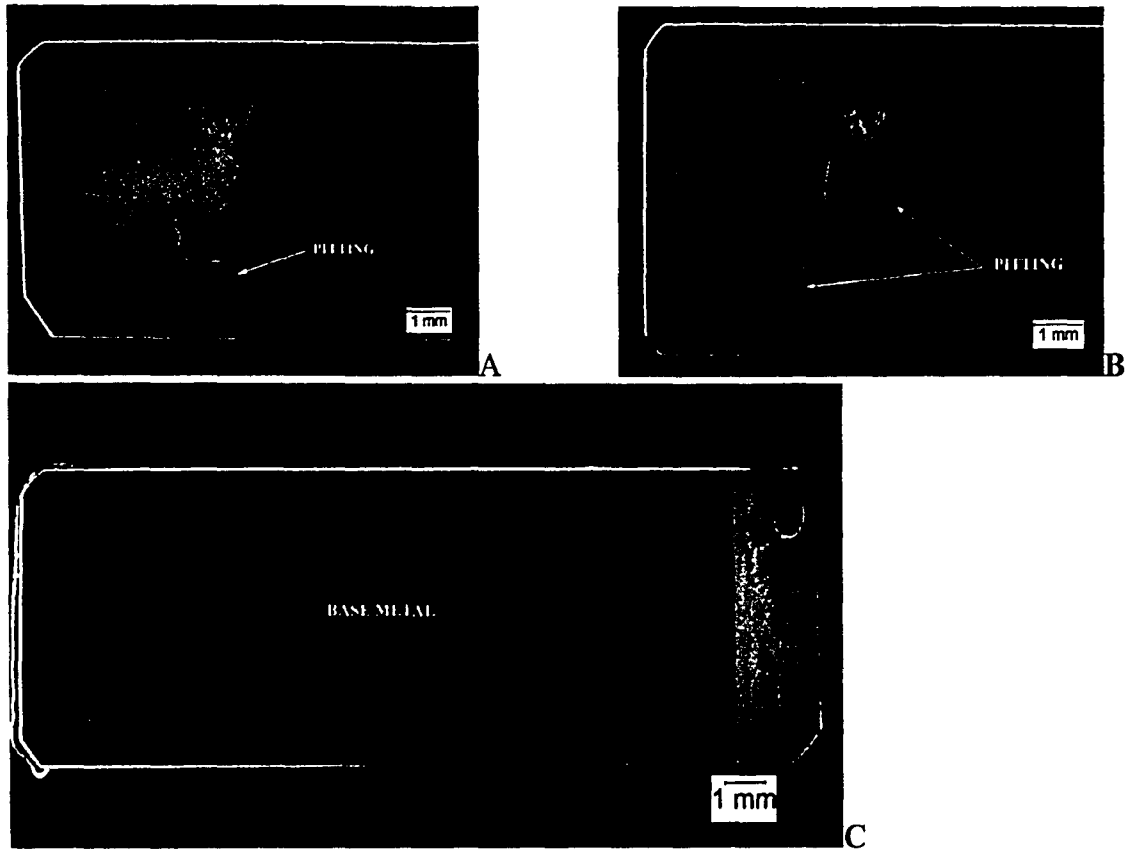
Pitting at 55°C of the CPT samples at A and B) the worm hole and tungsten and C) the crown side of the FS weld.
